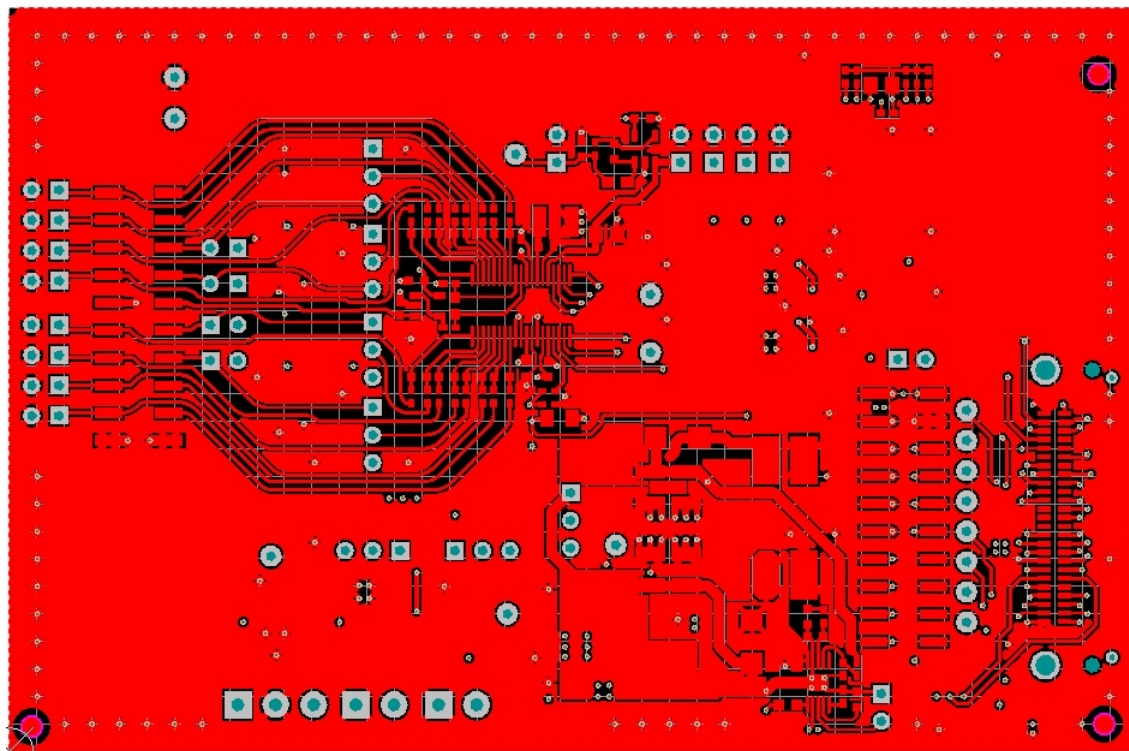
ADS86xxEVM PCB: Top Layer (L1)
